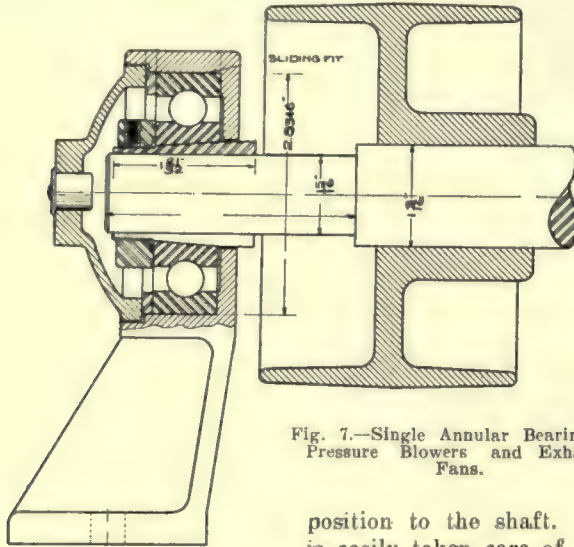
Single Annular Bearing for Pressure Blowers and Exhaust Fans.
